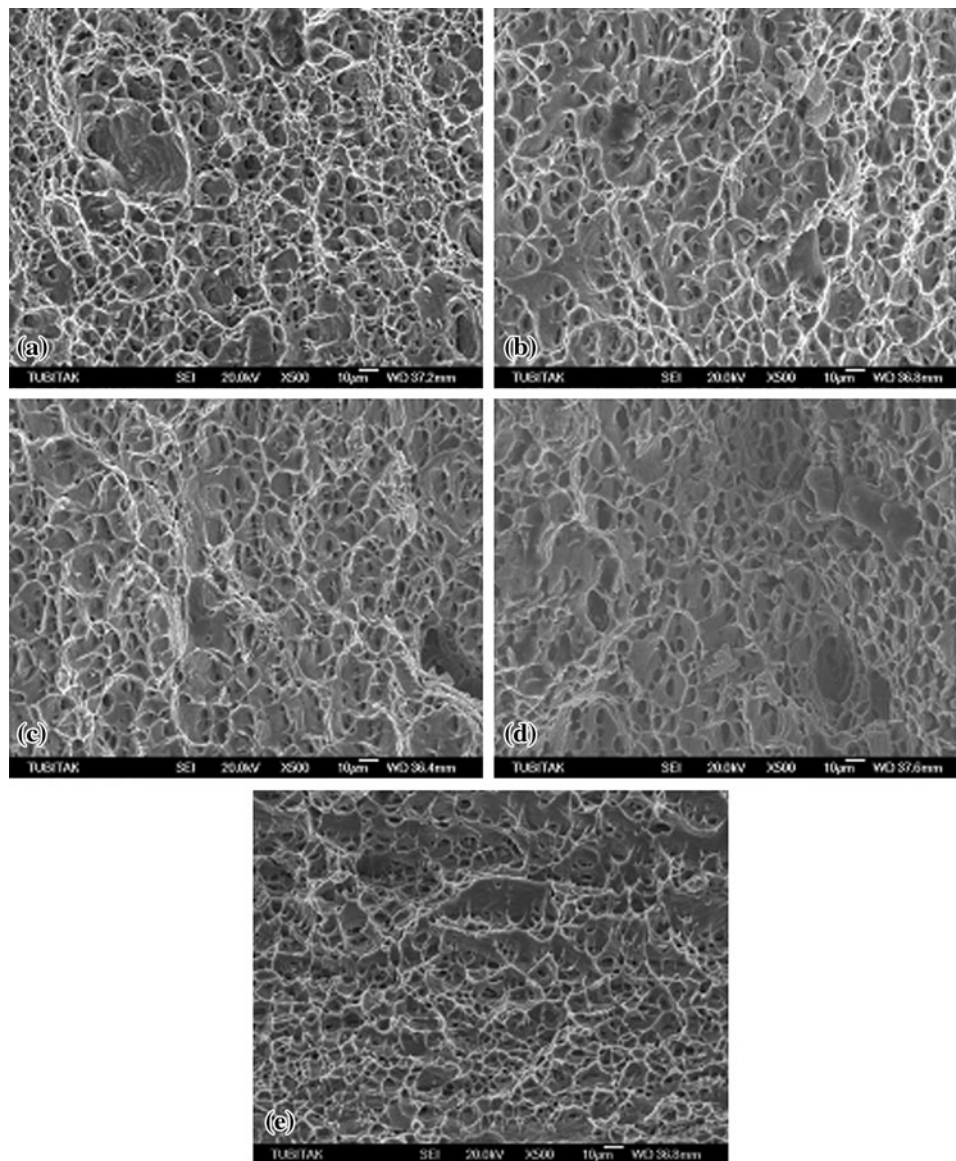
Fracture surfaces of the specimens (a) A2, (b) C1, (c) PWA2, (d) PWC1, and (e) BM
